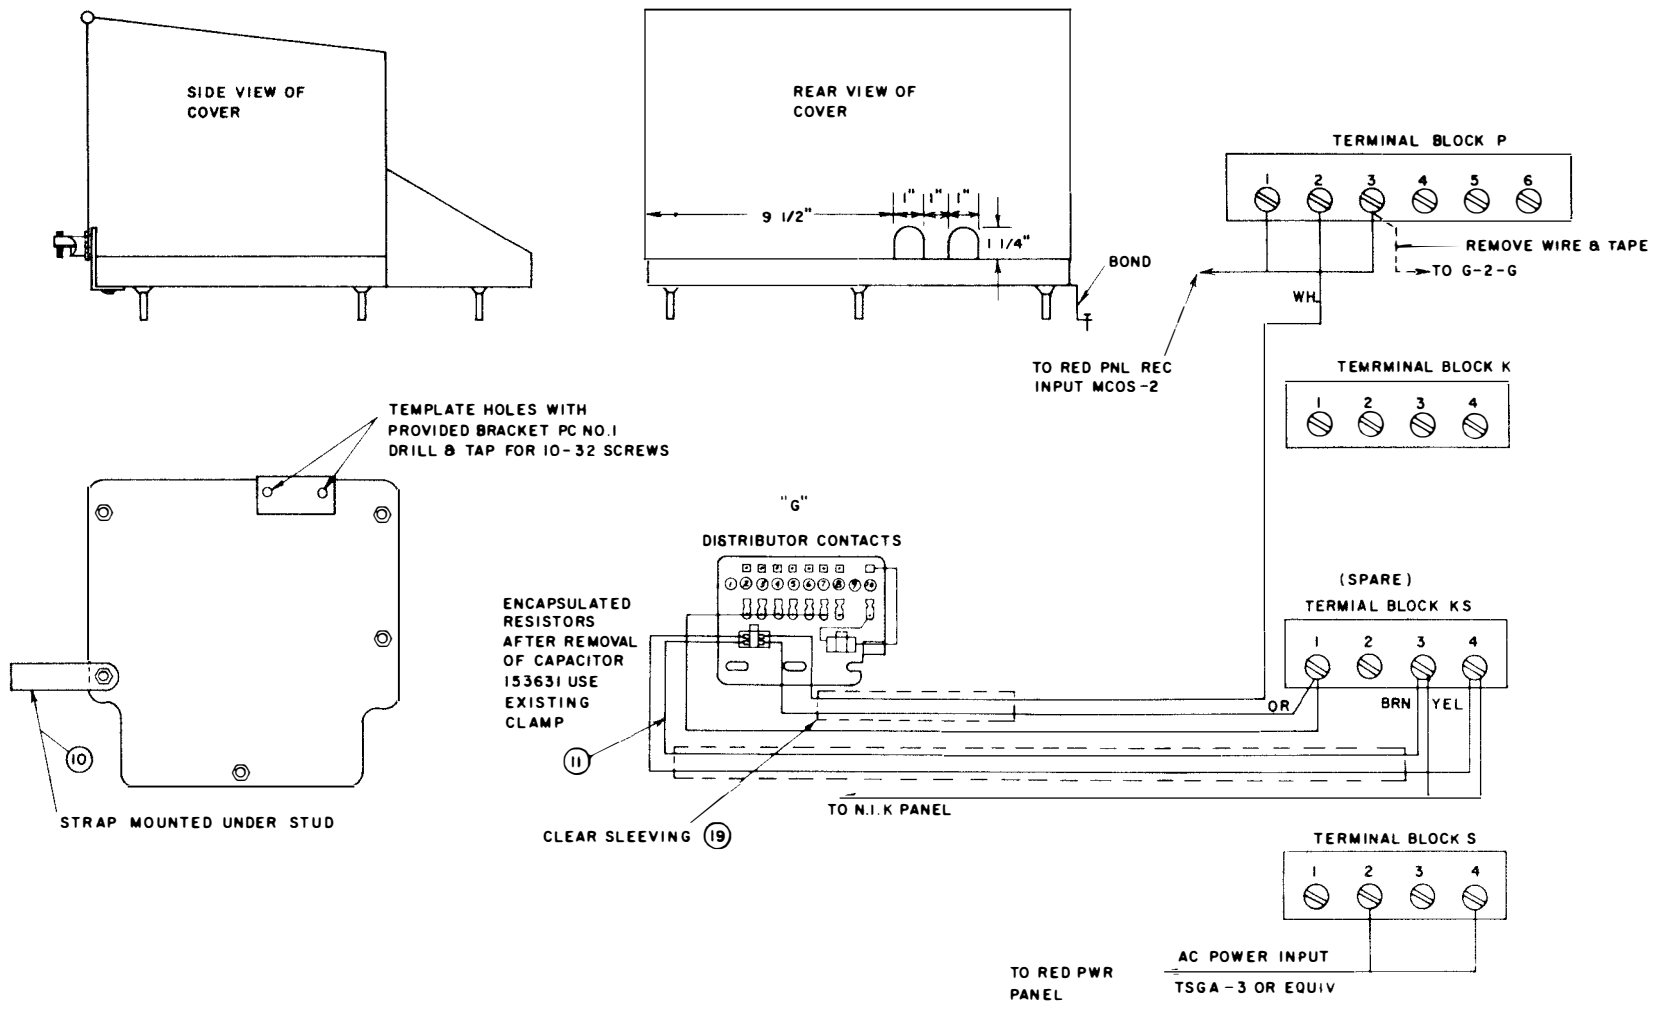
AN/UGC-20 Installation Drawing (Part 1)
